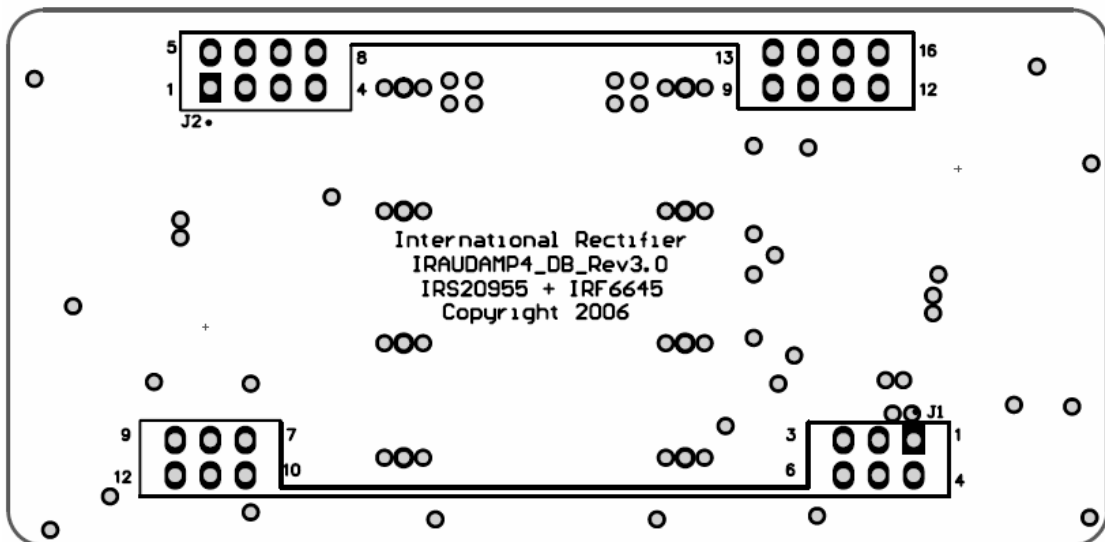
PCB Layout – Bottom-Side Solder-Mask and Silkscreen
